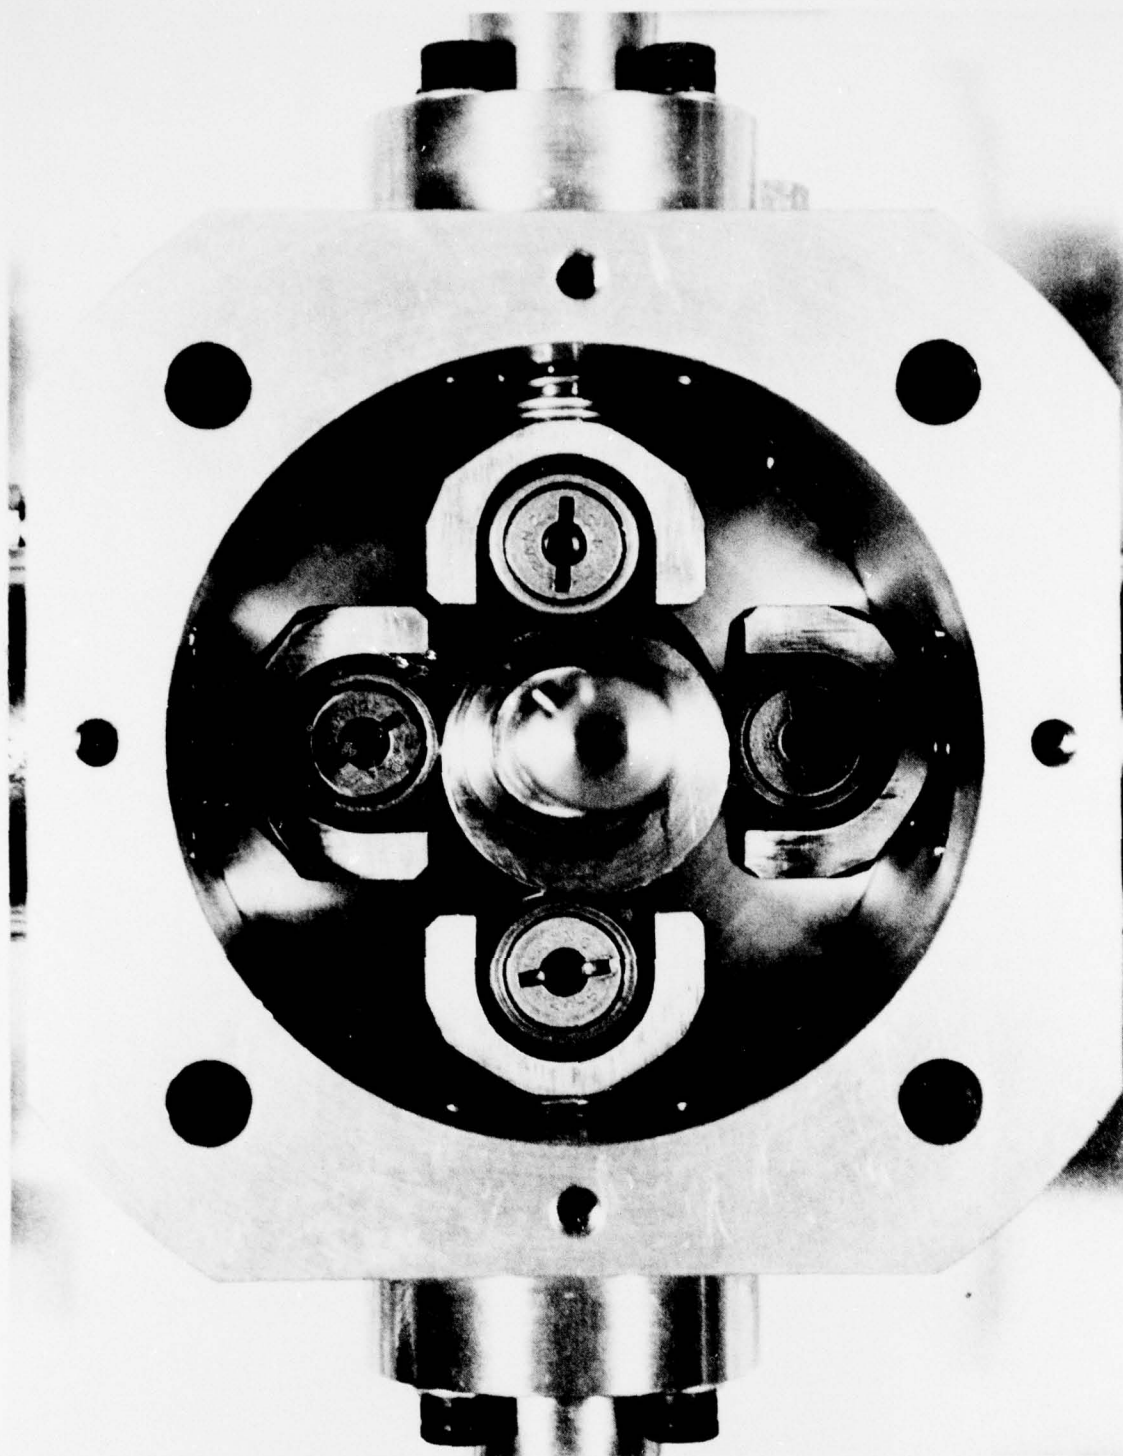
ENLARGED VIEW OF MAIN CASING WITH FRONT COVER PLATE REMOVED
